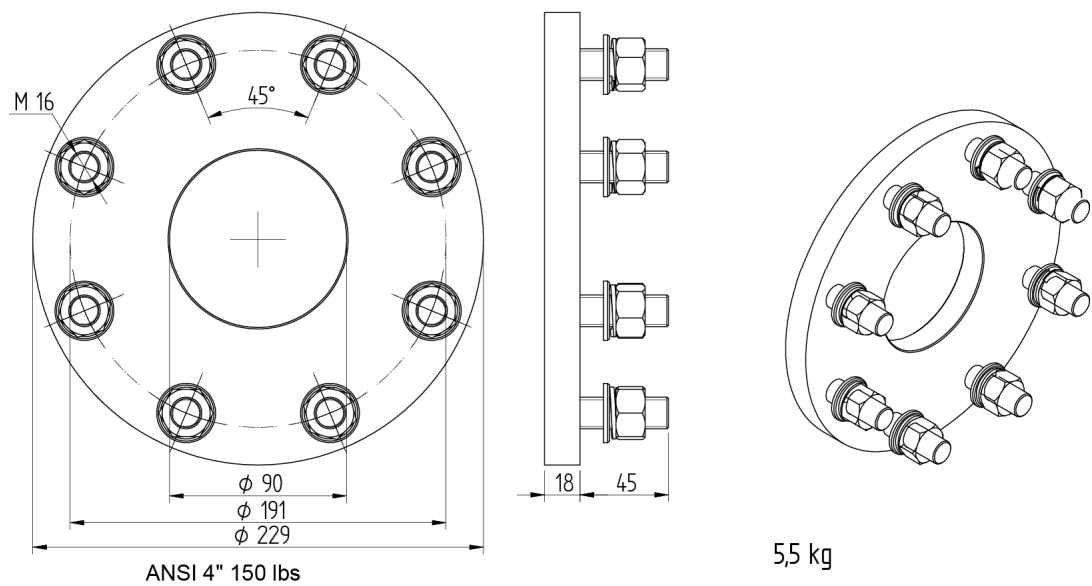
Dimensions (mm) of counter flange ADP-6000
